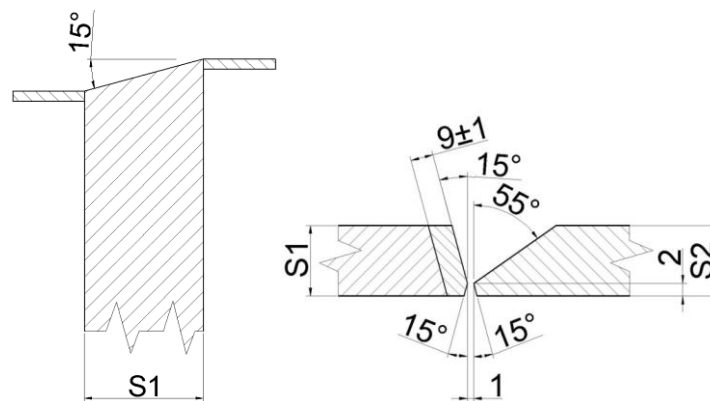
Technical drawing of the simulated MULTIMETAL DMW MU
